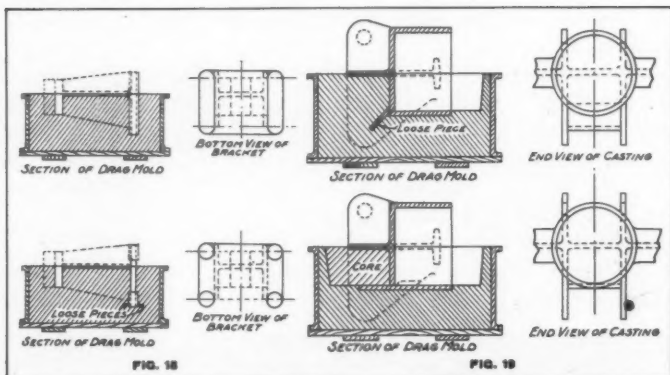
A BRACKET PATTERN WITH LOOSE PIECES FORMING BOSSES SHOWN AT BOTTOM, WITH THE IMPROVED DESIGN AT THE TOP
